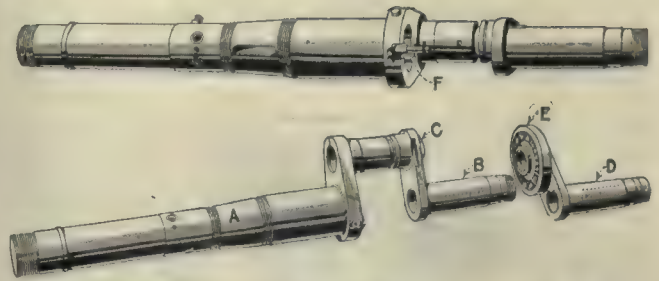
HOW THE CRANKSHAFT IS BUILT UP
